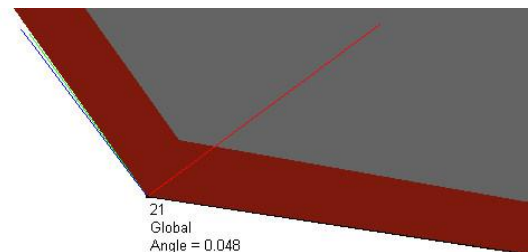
springback angle 0.048° for sheet thickness 3.2 mm
